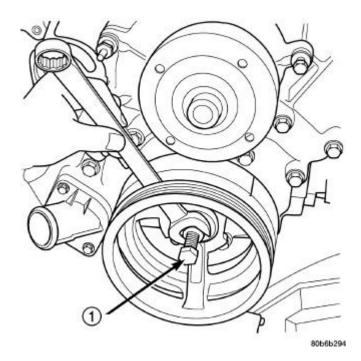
Pressing Damper Onto Crankshaft Using Special Tool 8512-A
